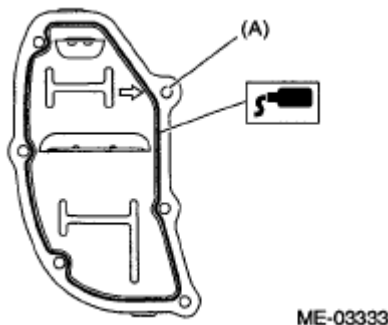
Applying Liquid Gasket To Mating Surfaces Of Oil Separator Cover
